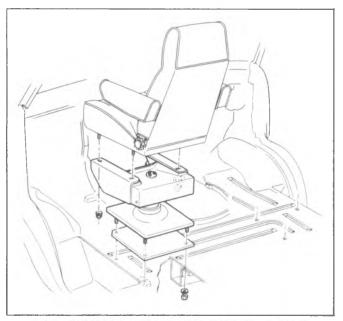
D-132--Swivel Bucket Seat Assembly - G Series
